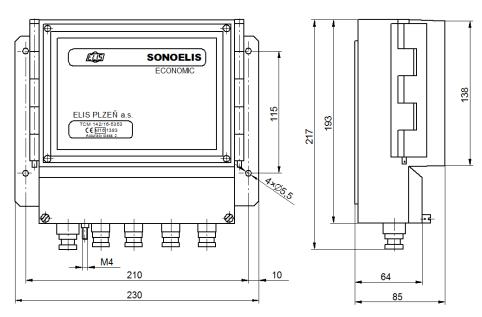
Dimensional sketch of the electronic unit box UP2.10
